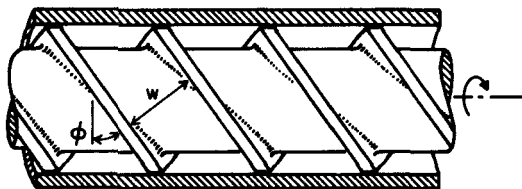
Schematic view of a single-screw extruder showing a double-flighted screw in a cylindrical barrel.
